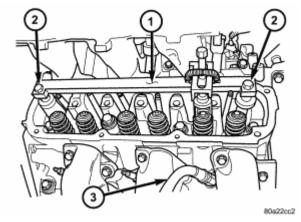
Spark Plug Adapter Courtesy of CHRYSLER LLC
